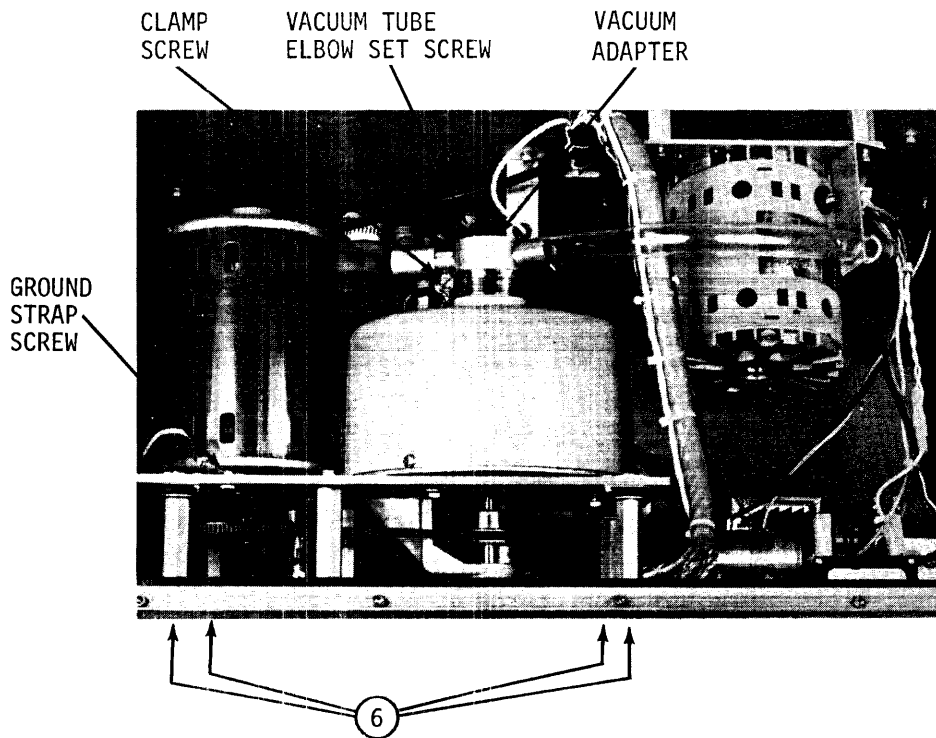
Removal of Vacuum Pump Motor Assembly
